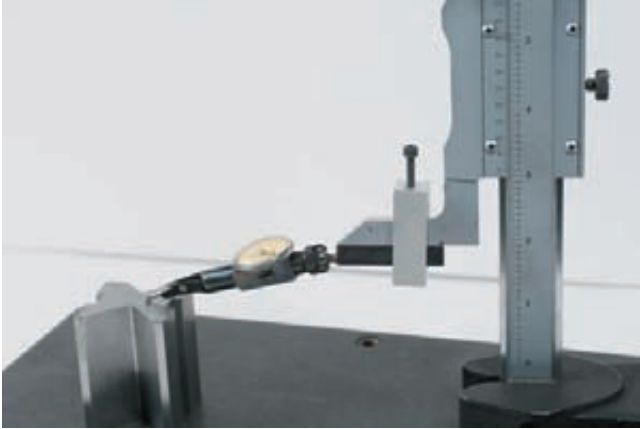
Using the dial test indicator and vernier height gage to measure the workpiece.
